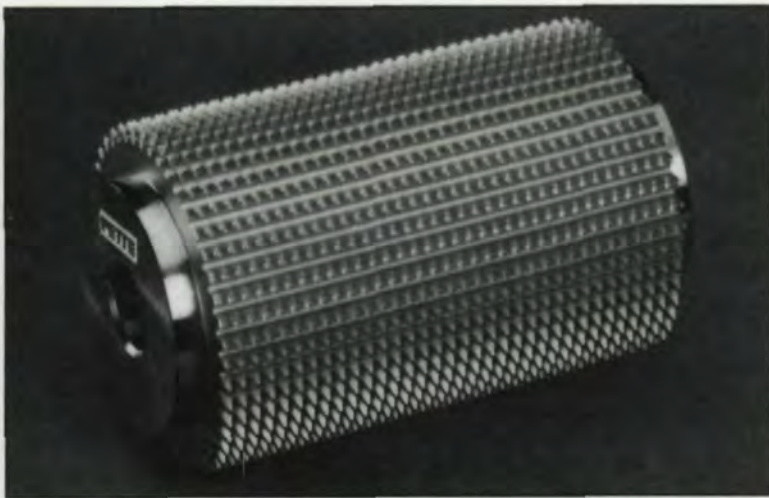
Gash-Master™ hob manufactured by Fette Tool Systems, Inc. (Courtesy Fette Tool Systems.)
